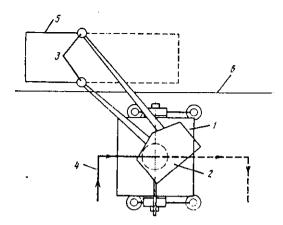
Design for executing a hole cutting operation: 1) transport module; 2) industrial module; 3) cutters; 4) trajectory of robot center; 5) contour of cut hole; 6) boundary of travel surface.
